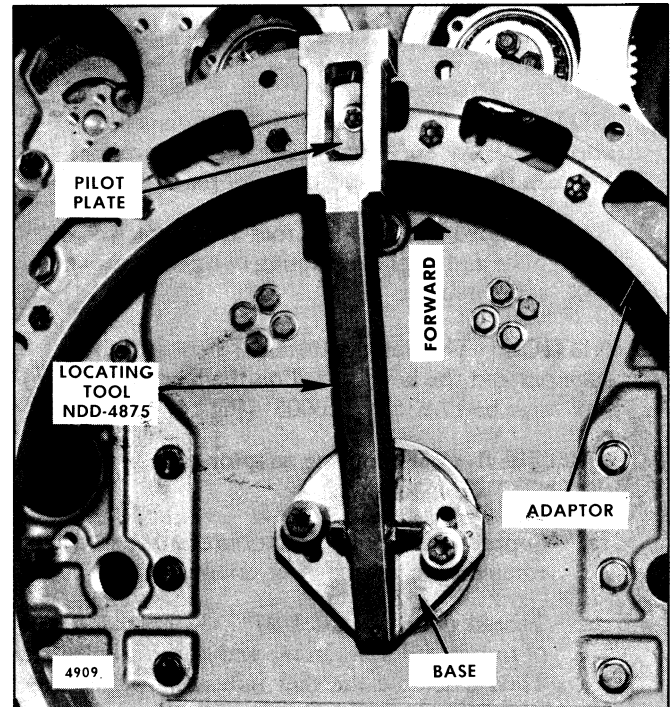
Locating Tool (NDD-4875) Positioned on Crankshaft and Flywheel Housing Adaptor (Former Adaptor)
